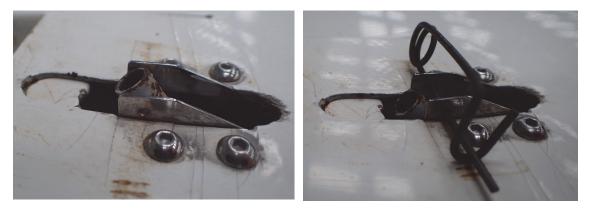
Standard Cirrus 75 Modified tailplane attachment mechanism (view looking forward)
